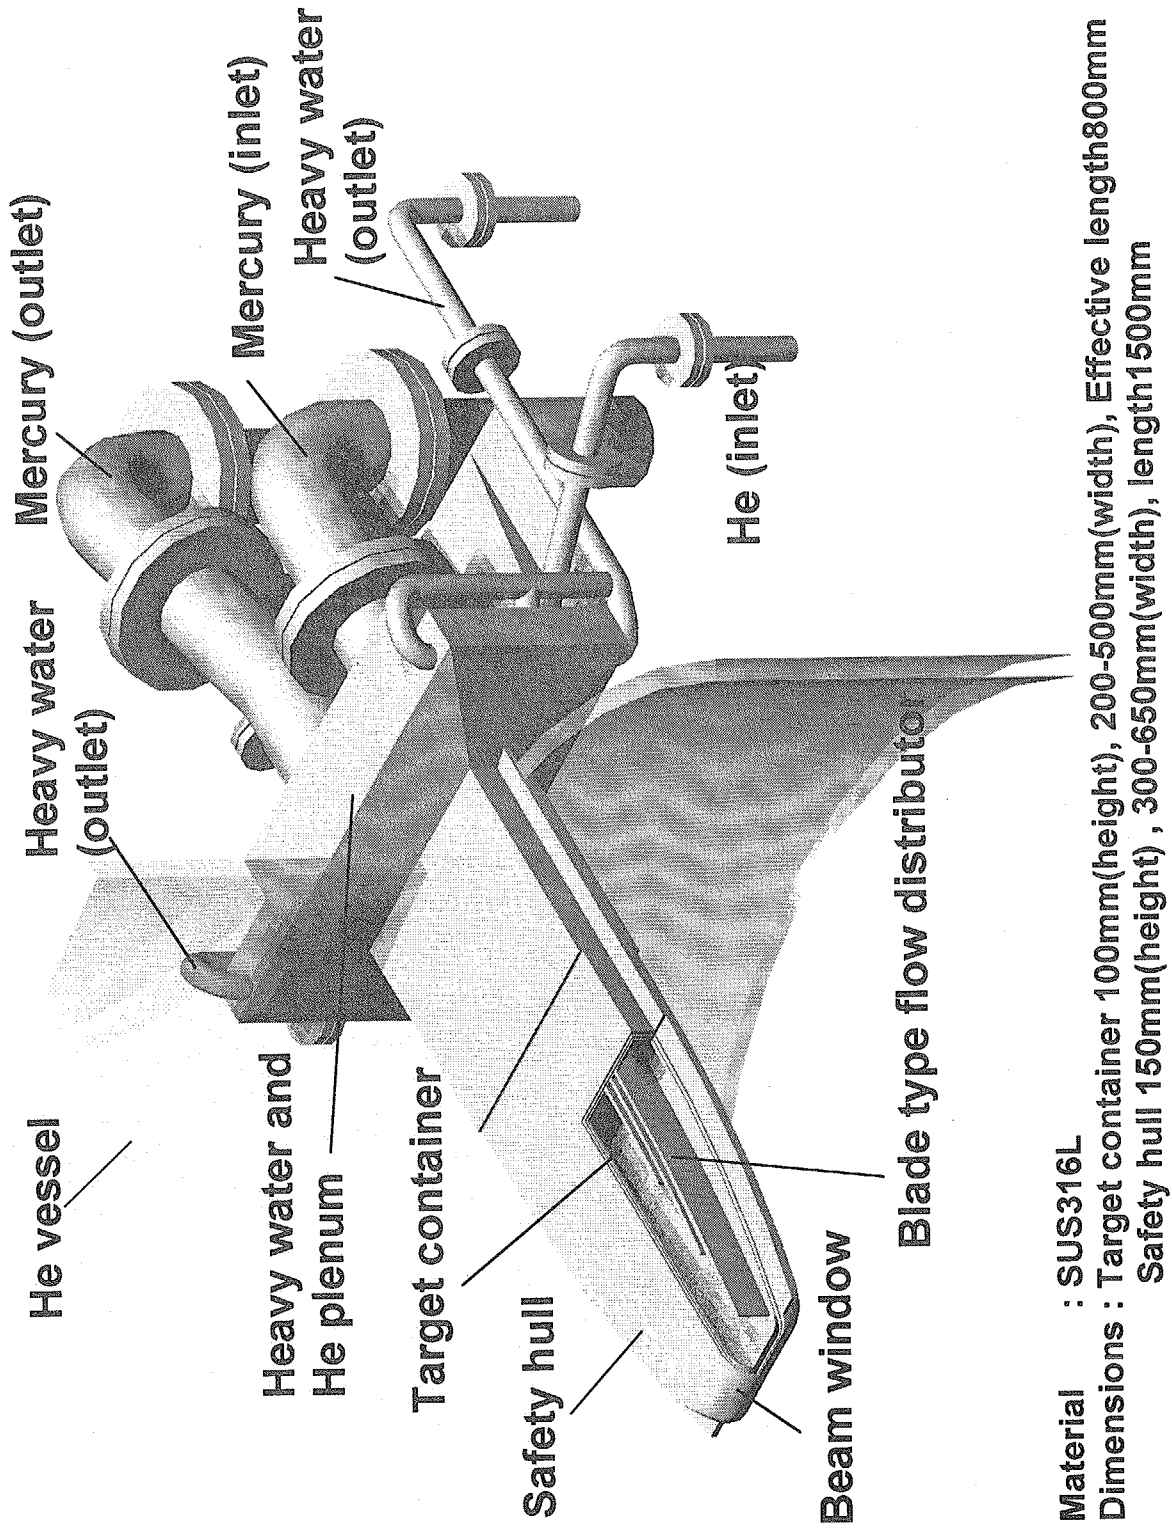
Outer and cutaway view of the integrated CFT Target container with a safety hull
